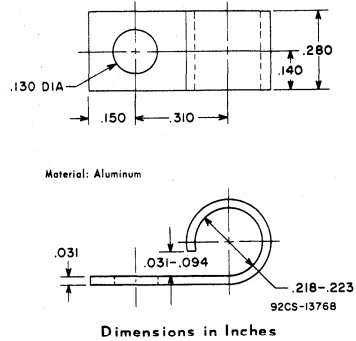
Detail Drawing of RCA-SA2100 Heat-Sink Attachment Clip.
